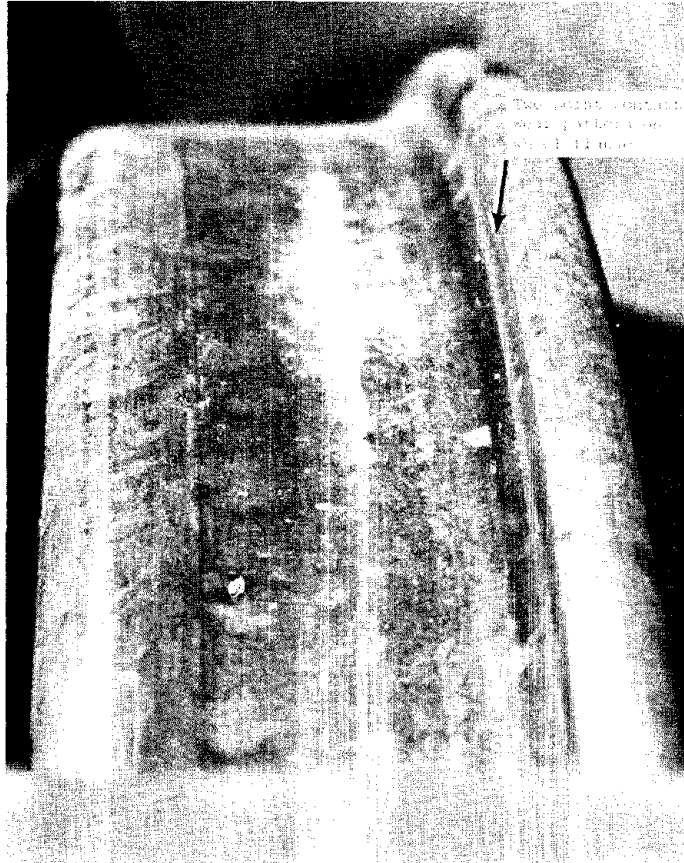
VIEW OF THE INITIAL RAPID FLANGE WEAR PATTERN.
